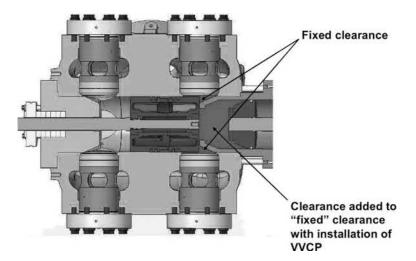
Sectional view of a variable volume clearance pocket.
